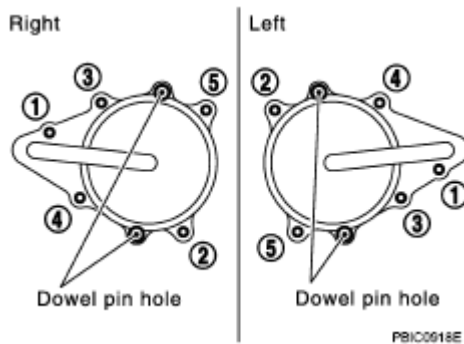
Identifying Intake Valve Timing Control Covers Bolts Tightening Sequence
